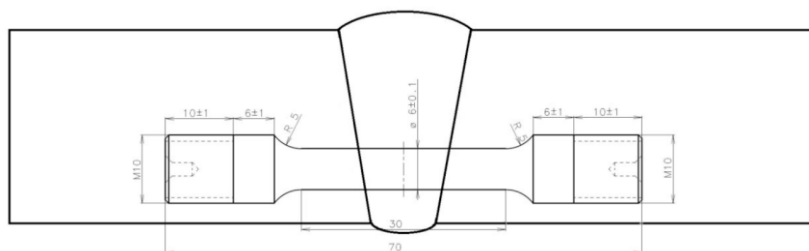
Orientation and dimensions of the creep specimen taken from an operationally exposed homogeneous weld joint of steel 15 128.5.
